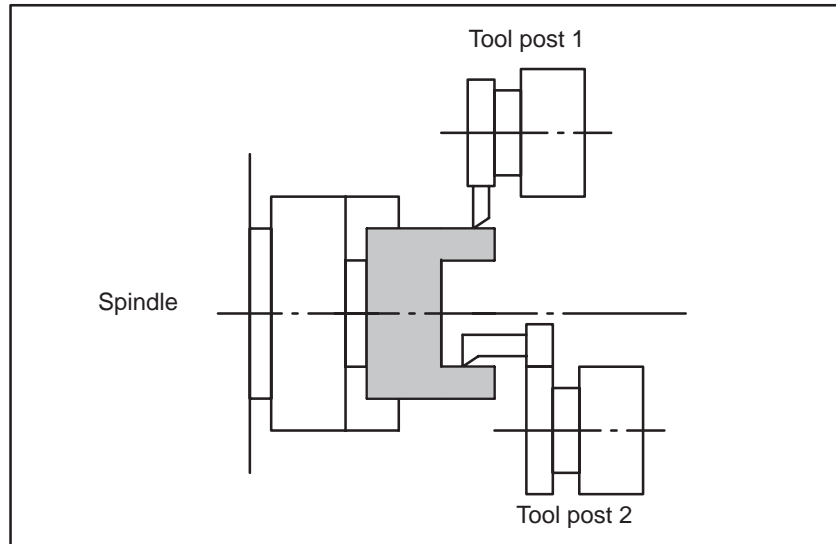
(a) Application to lathes with one spindle and tow tool posts
